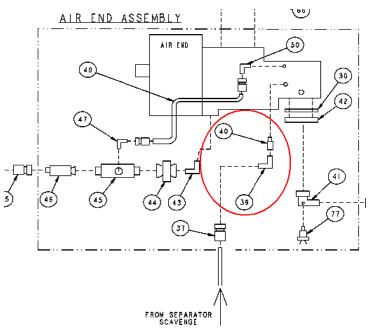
Compressor location of scavenge line. Elbow and adapter installed in the side of the compressor.
